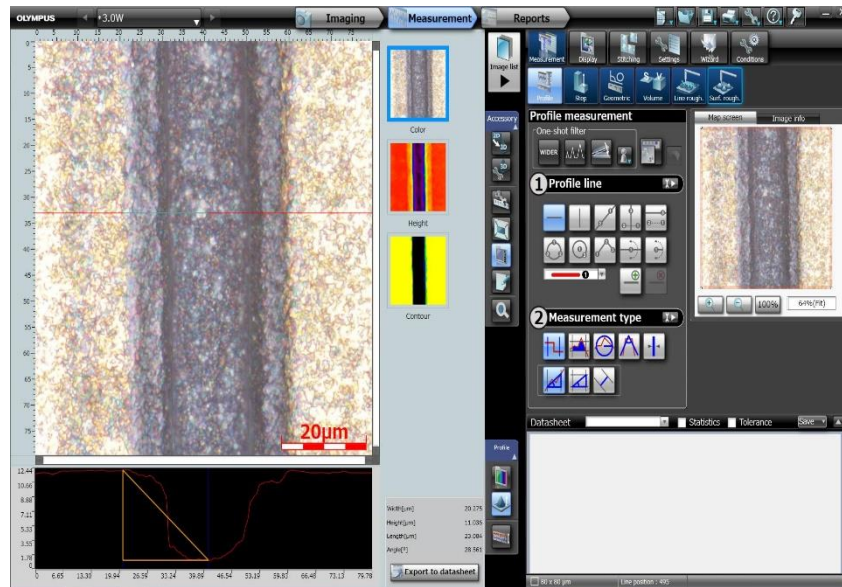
Dimensional measurement of micro-texture after grooving on cutting insert.
